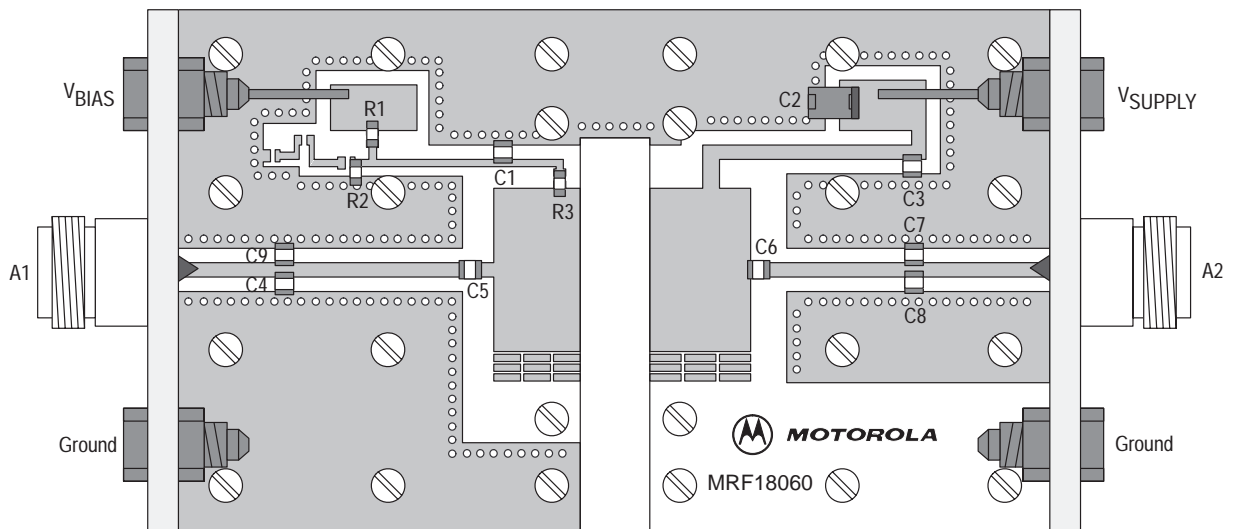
1930 – 1990 MHz Test Fixture Component Layout
